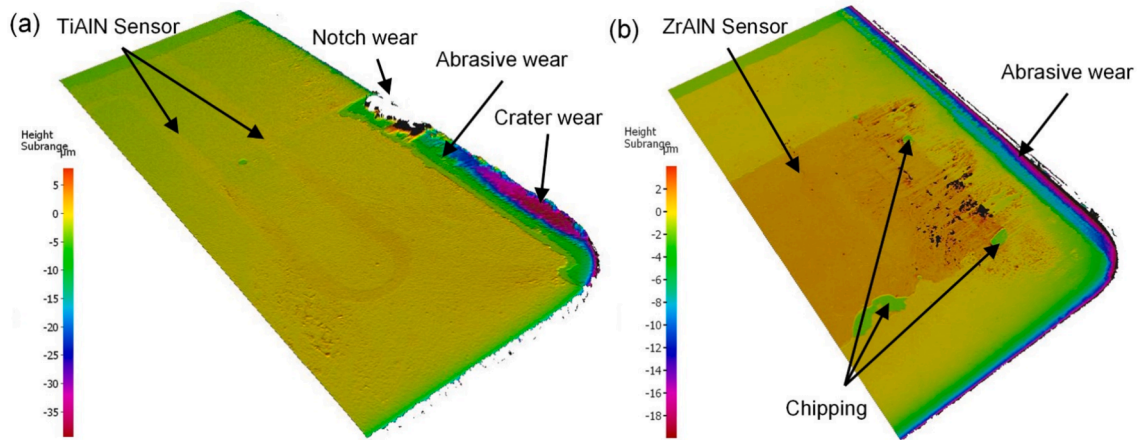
3D surface analysis of the cutting tool near the cutting edge after the cutting experiments: (a) surface 3D color profile for the cutting tool with TiAlN sensor, indicating notch wear, abrasive wear, and crater wear; (b) surface 3D color profile for the cutting tool with ZrAlN sensor, showing abrasive wear and chipping.
